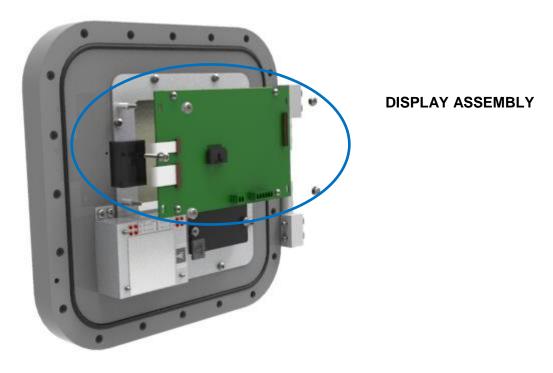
ML II/ RCU II EXL Unit Cover Display Assembly
